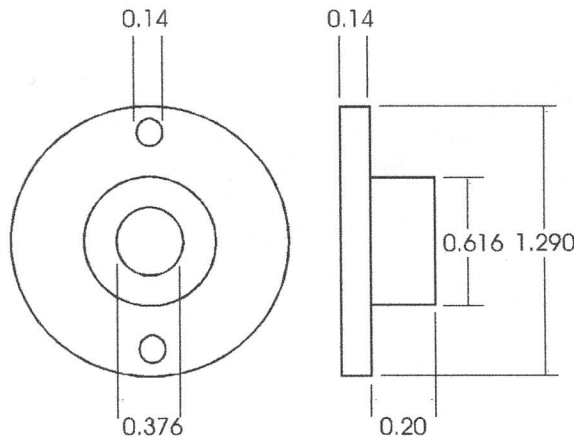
Prototype bronze bushings for TR6 accelerator shaft.
